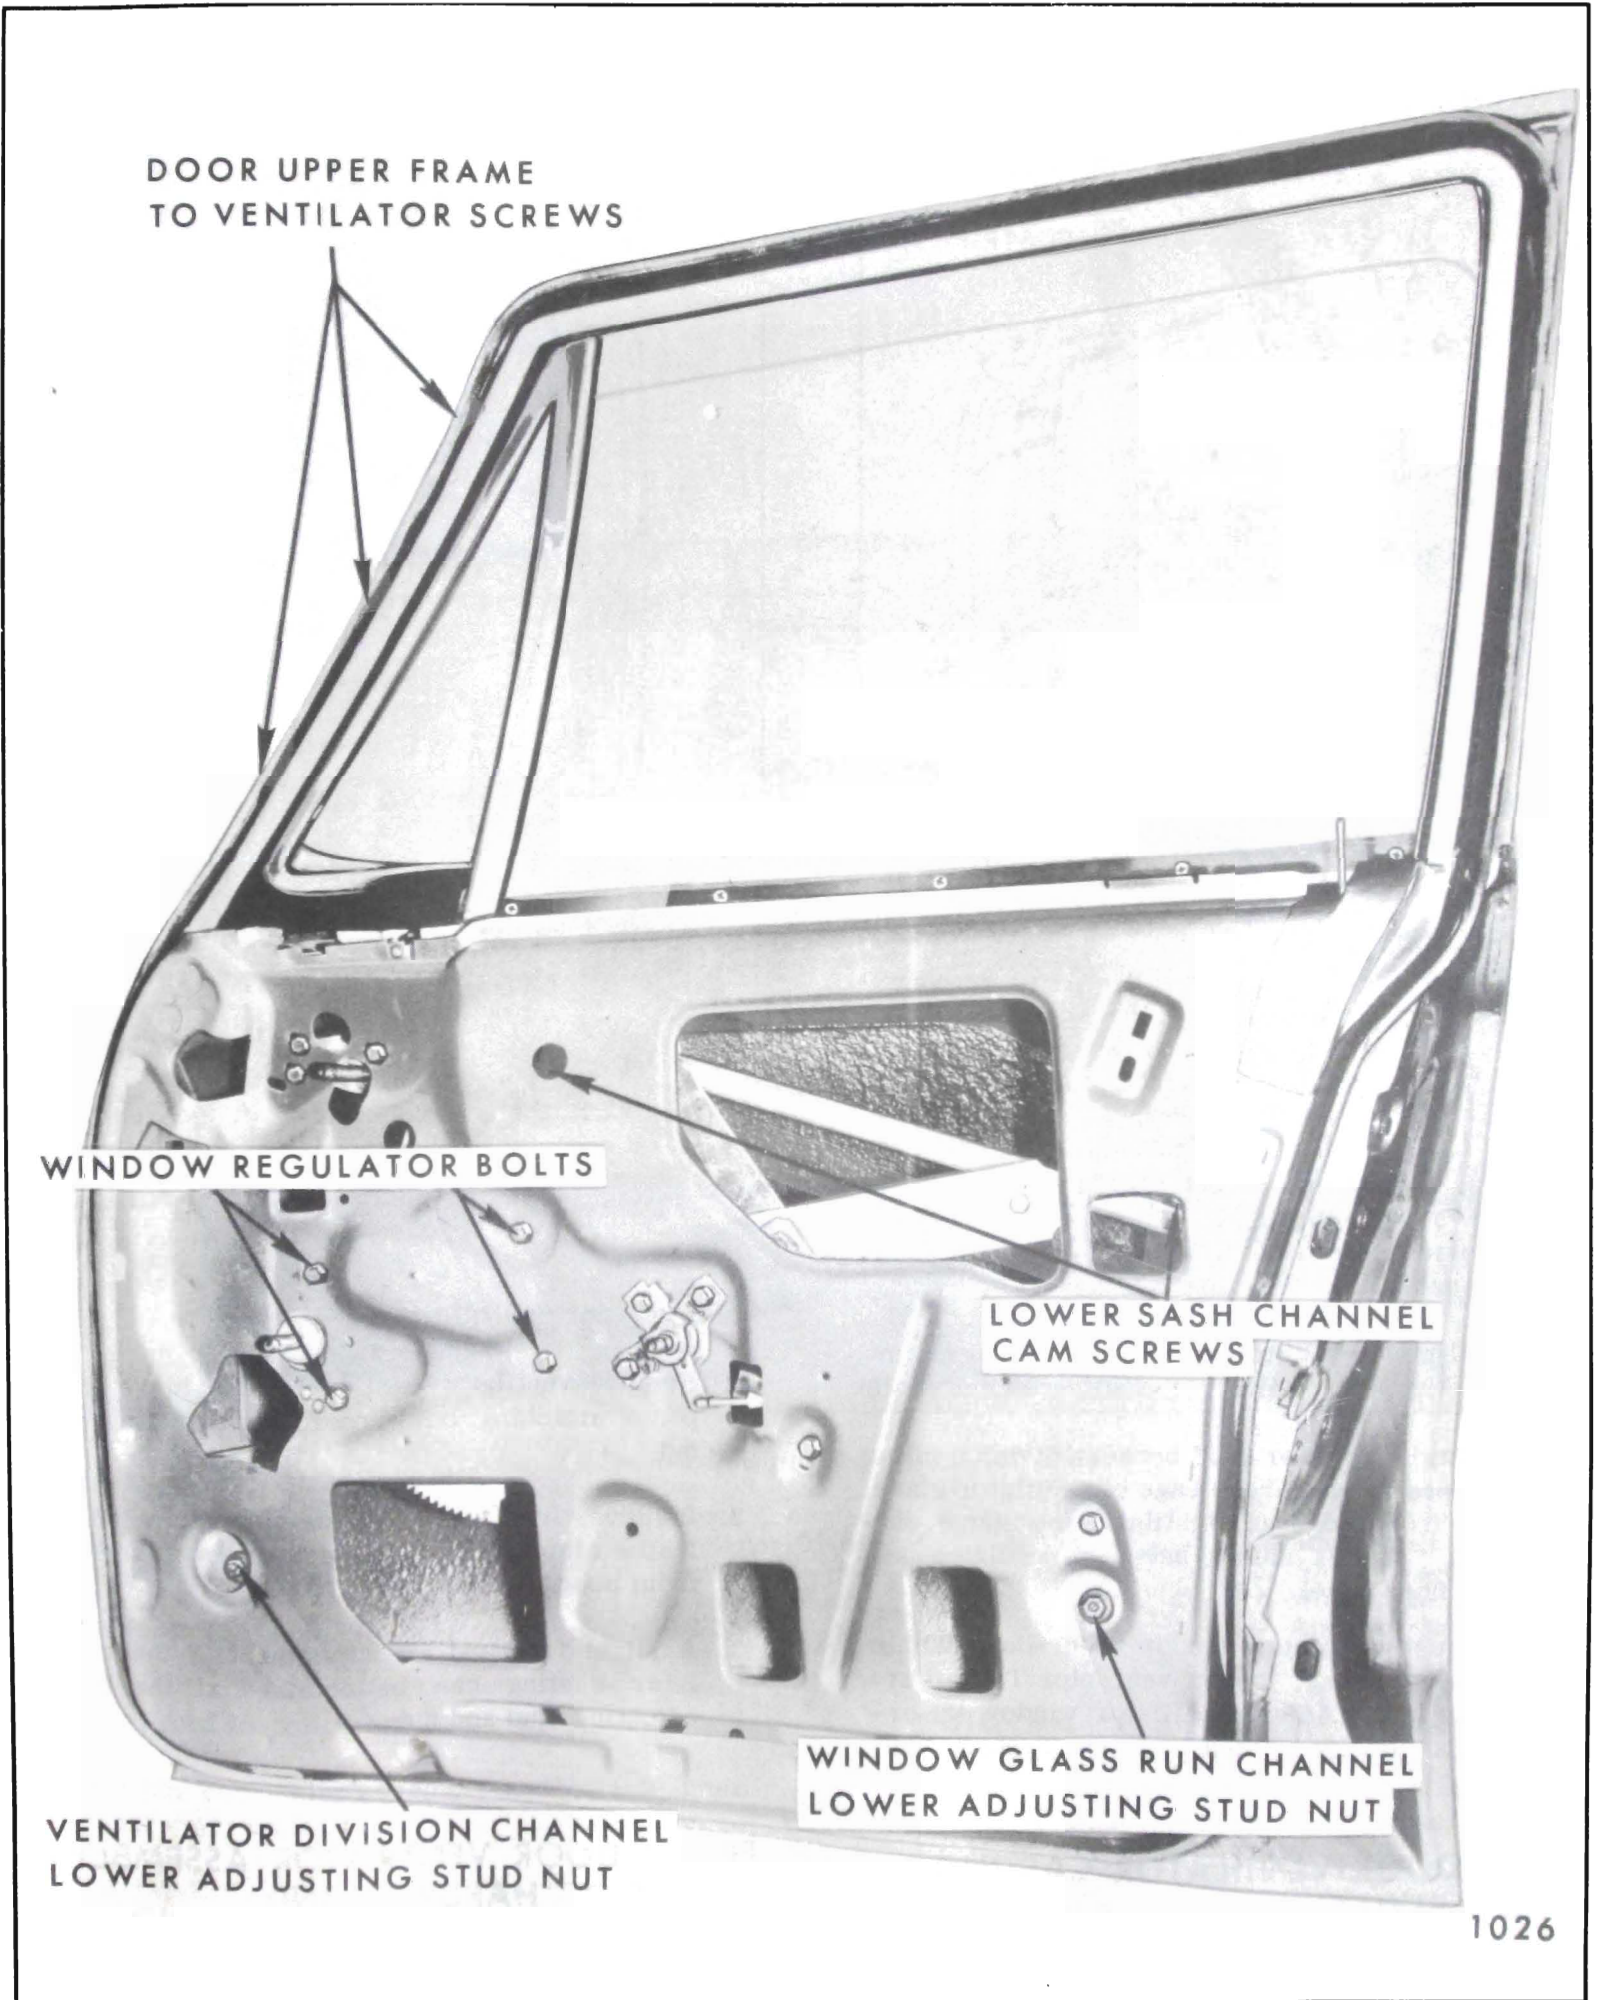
Door Ventilator and Regulator Attachment - "B & C" Closed Styles
